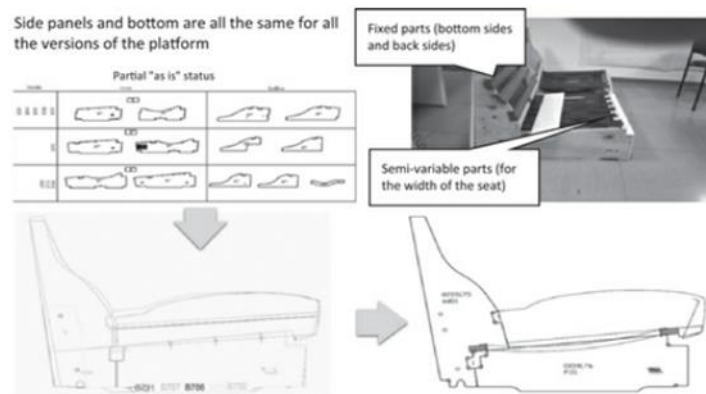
Example of a technique for reducing components in the pilot industrial platform
